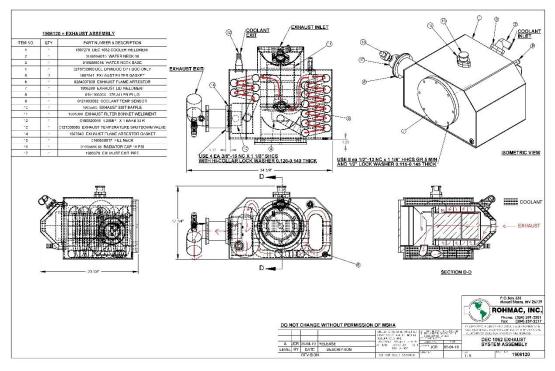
Revised Diesel Power Package Exhaust Assembly Drawing
